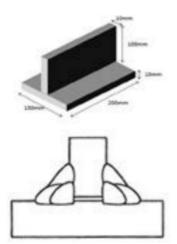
Configuration of test specimens: T-bar (top) and weld (bottom).
